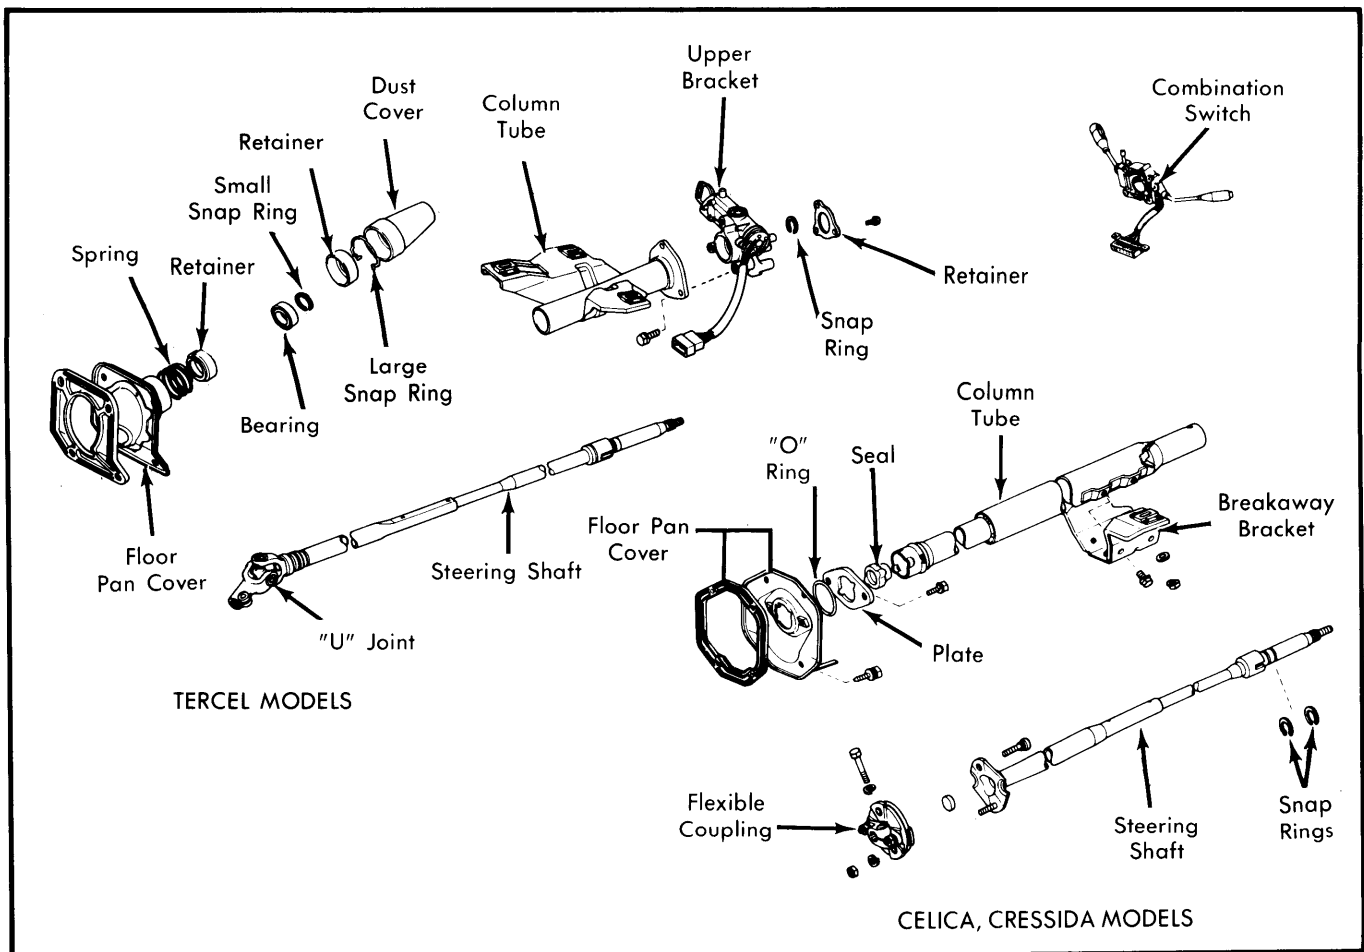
Exploded View of Celica, Cressida and Tercel Steering Columns
